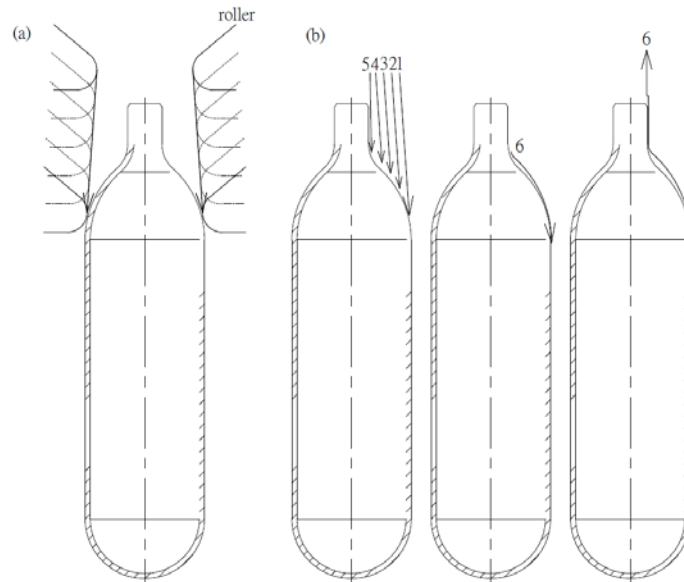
Schema of roller moving path (a) first step (b) six steps
